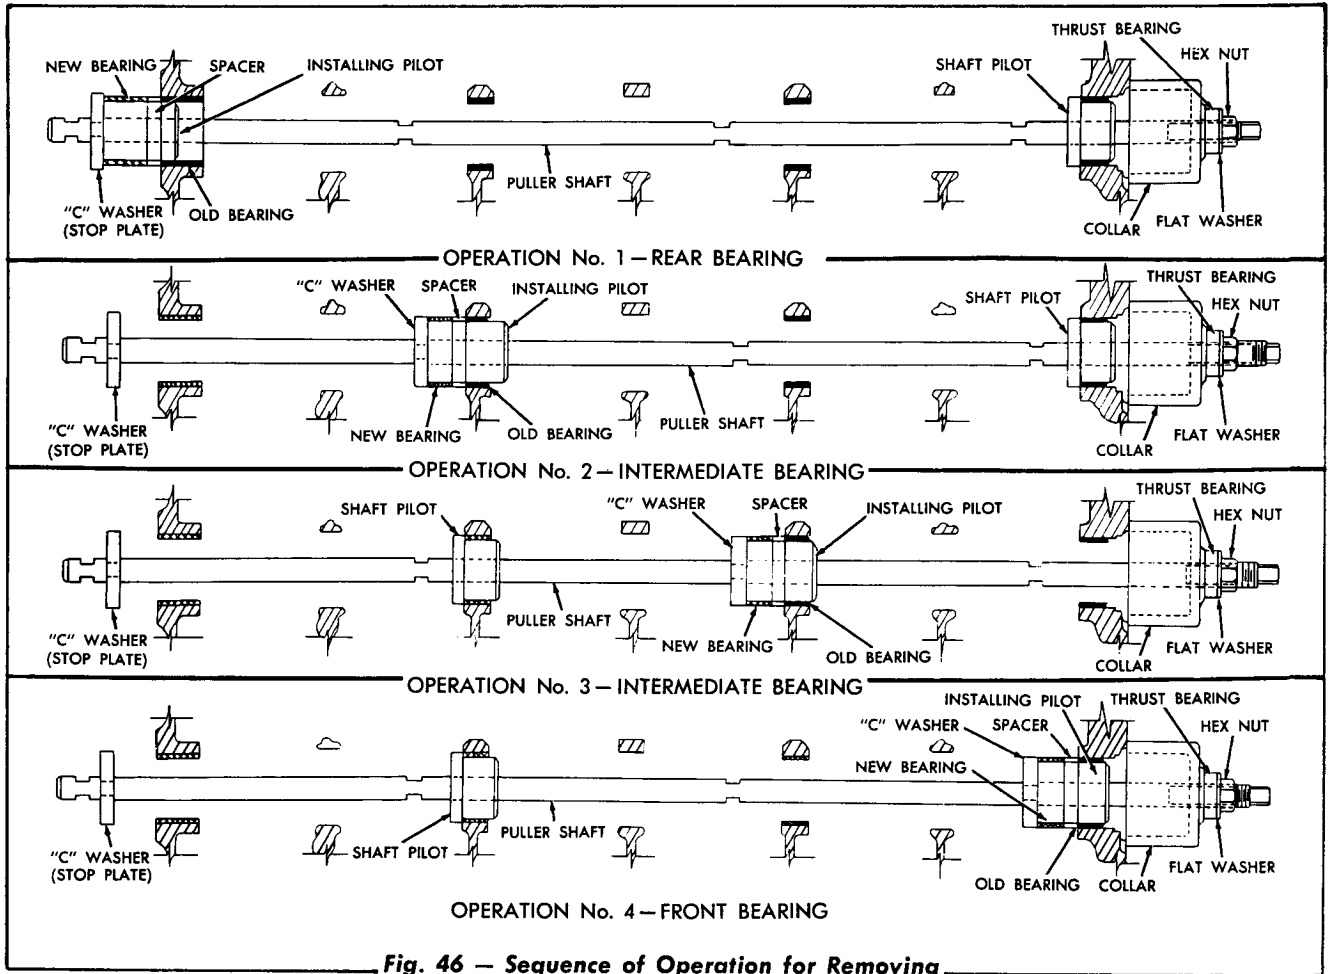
Sequence of Operation for Removing and Installing Camshaft Bearings
